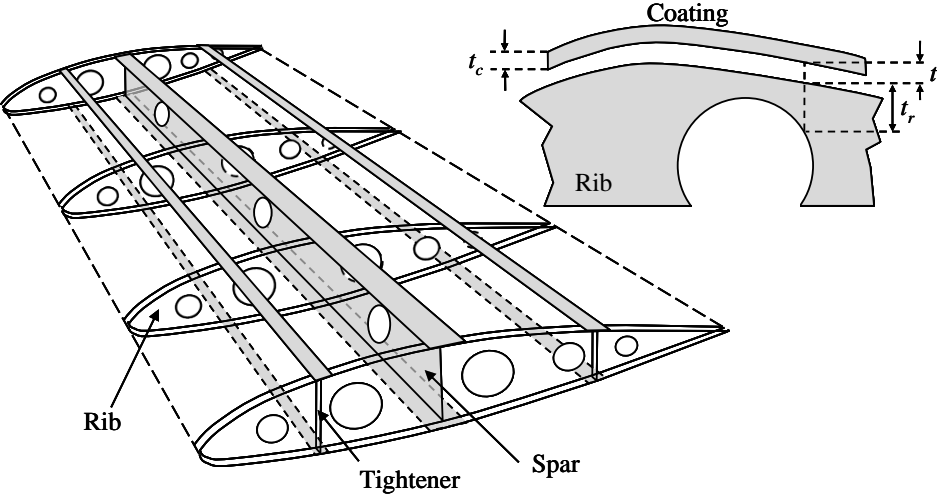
Structure of an aircraft wing and cut view of the assembly of a coating on a rib.
